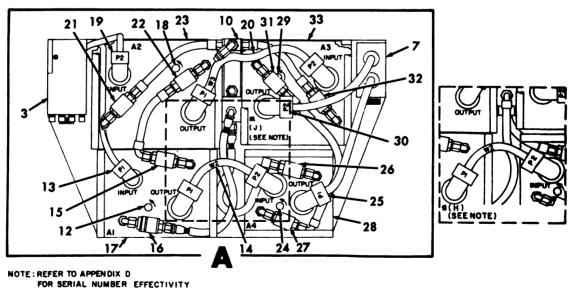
Replacement of the high-voltage power supply assemblies.
